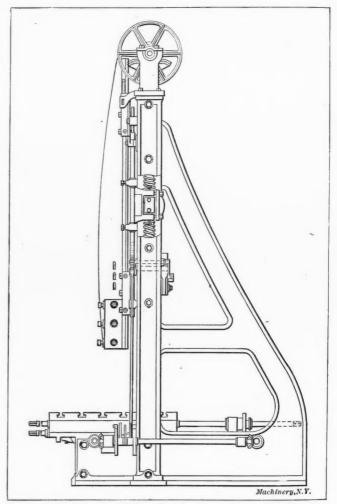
Early Self-acting Slotting Machine, Screw-driven. Side Elevation.
